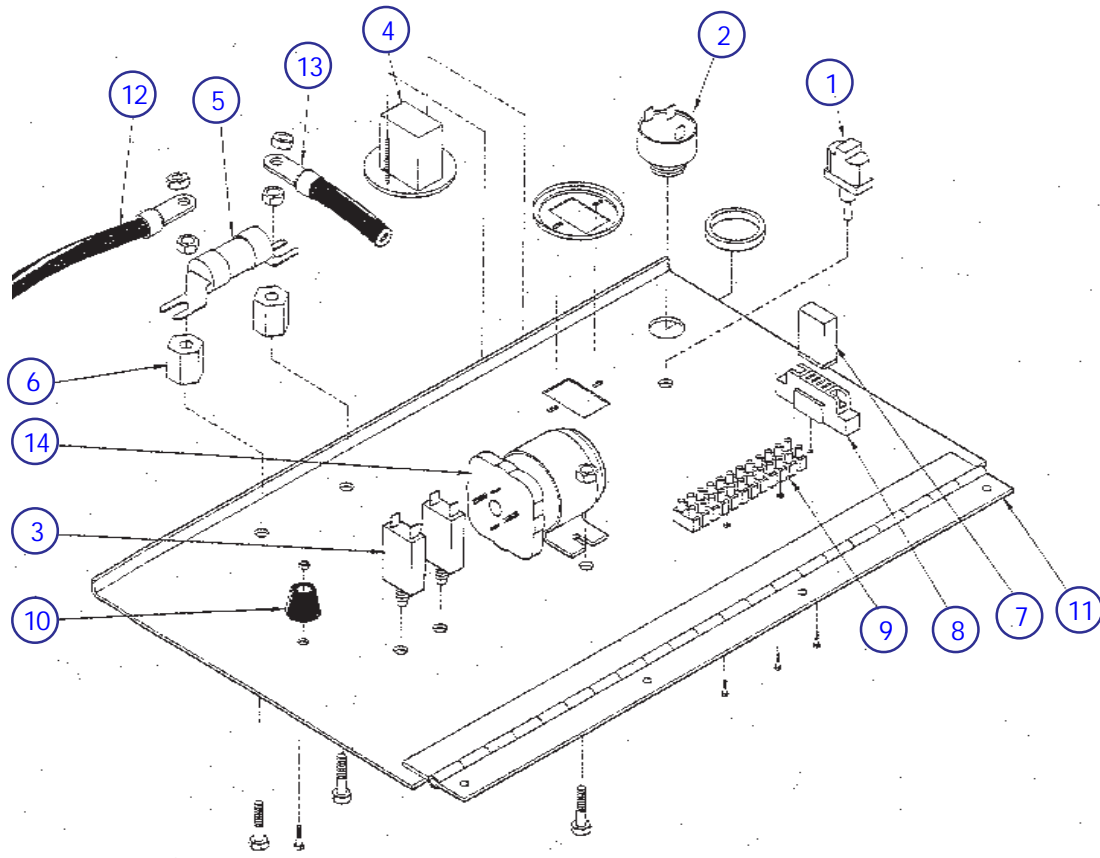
, Hydraulic Tray Assembly (Continued)
